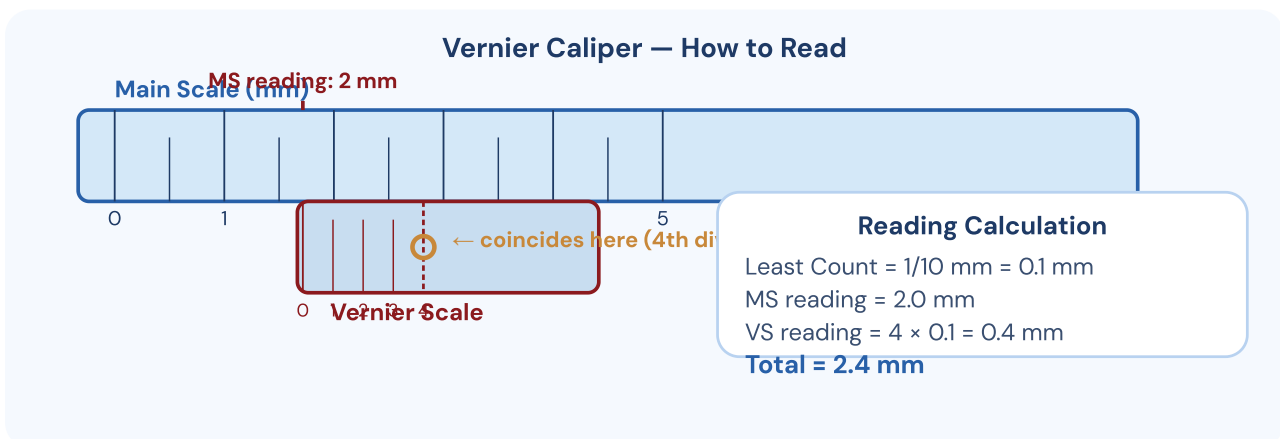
Vernier caliper reading. The main scale gives the whole mm reading (2 mm). The Vernier scale division that coincides with a main scale line (4th here) gives the fractional part (0.4 mm). Total = 2.4 mm.
